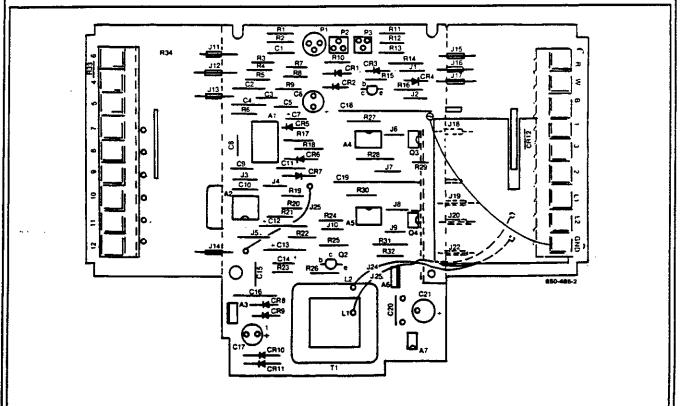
V and 220/240V - Printed Wiring Board Assembly
